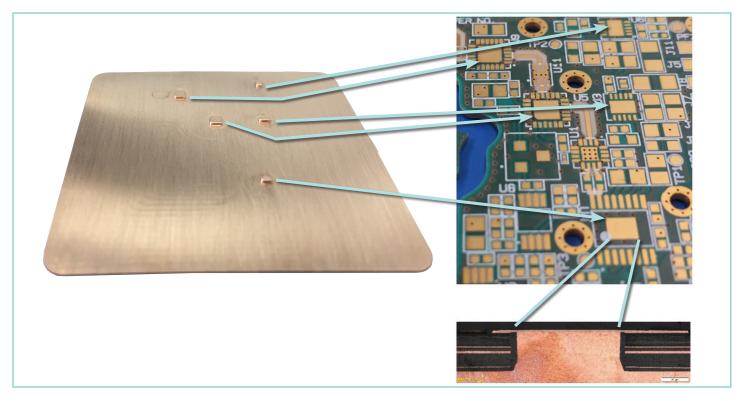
Machined copper plane with up-stands, applicable for small circuits
